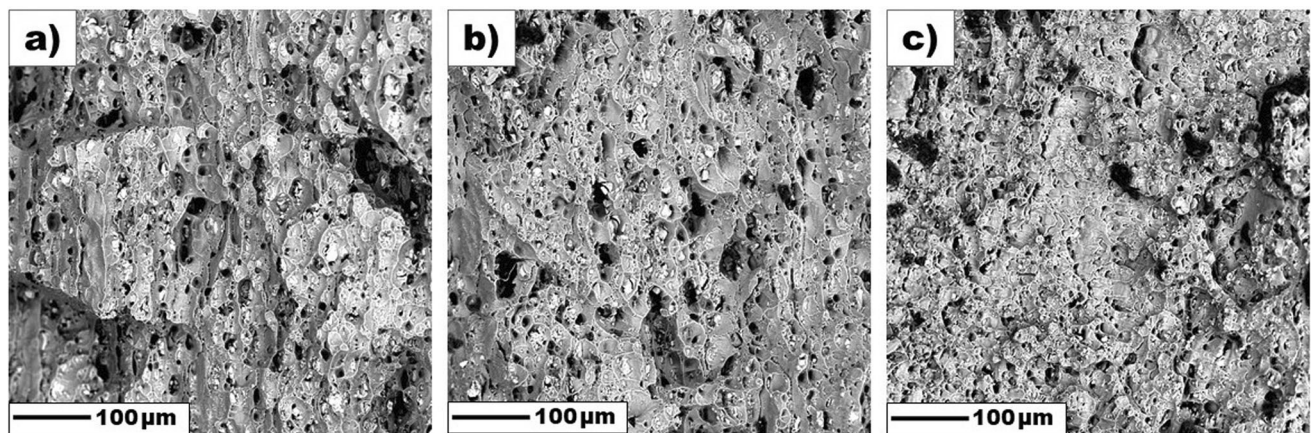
Fracture surface of the base material AA6082 (a) and the FSW joints produced with the tapered cylindrical pin (b) and hexagonal pin with grooves (c) subjected to tensile tests
